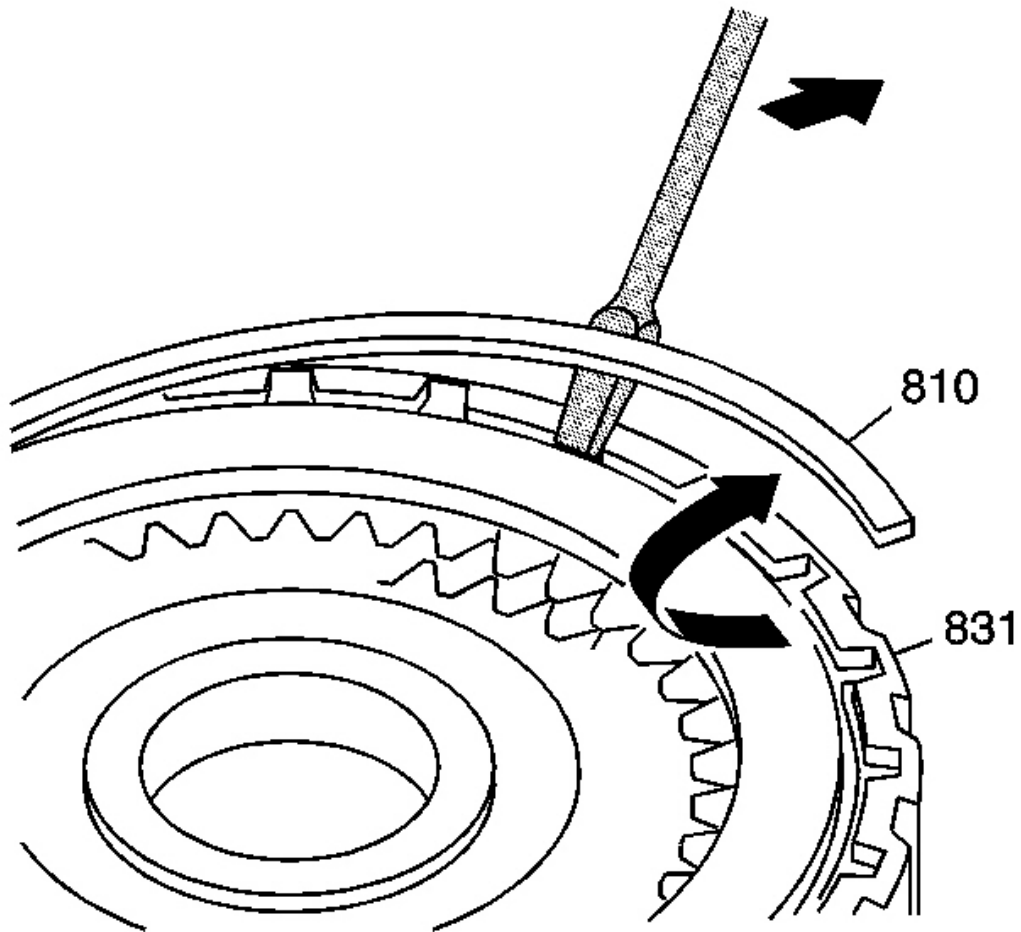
Removing 3rd Clutch Backing Plate Retaining Ring Using J 28585
